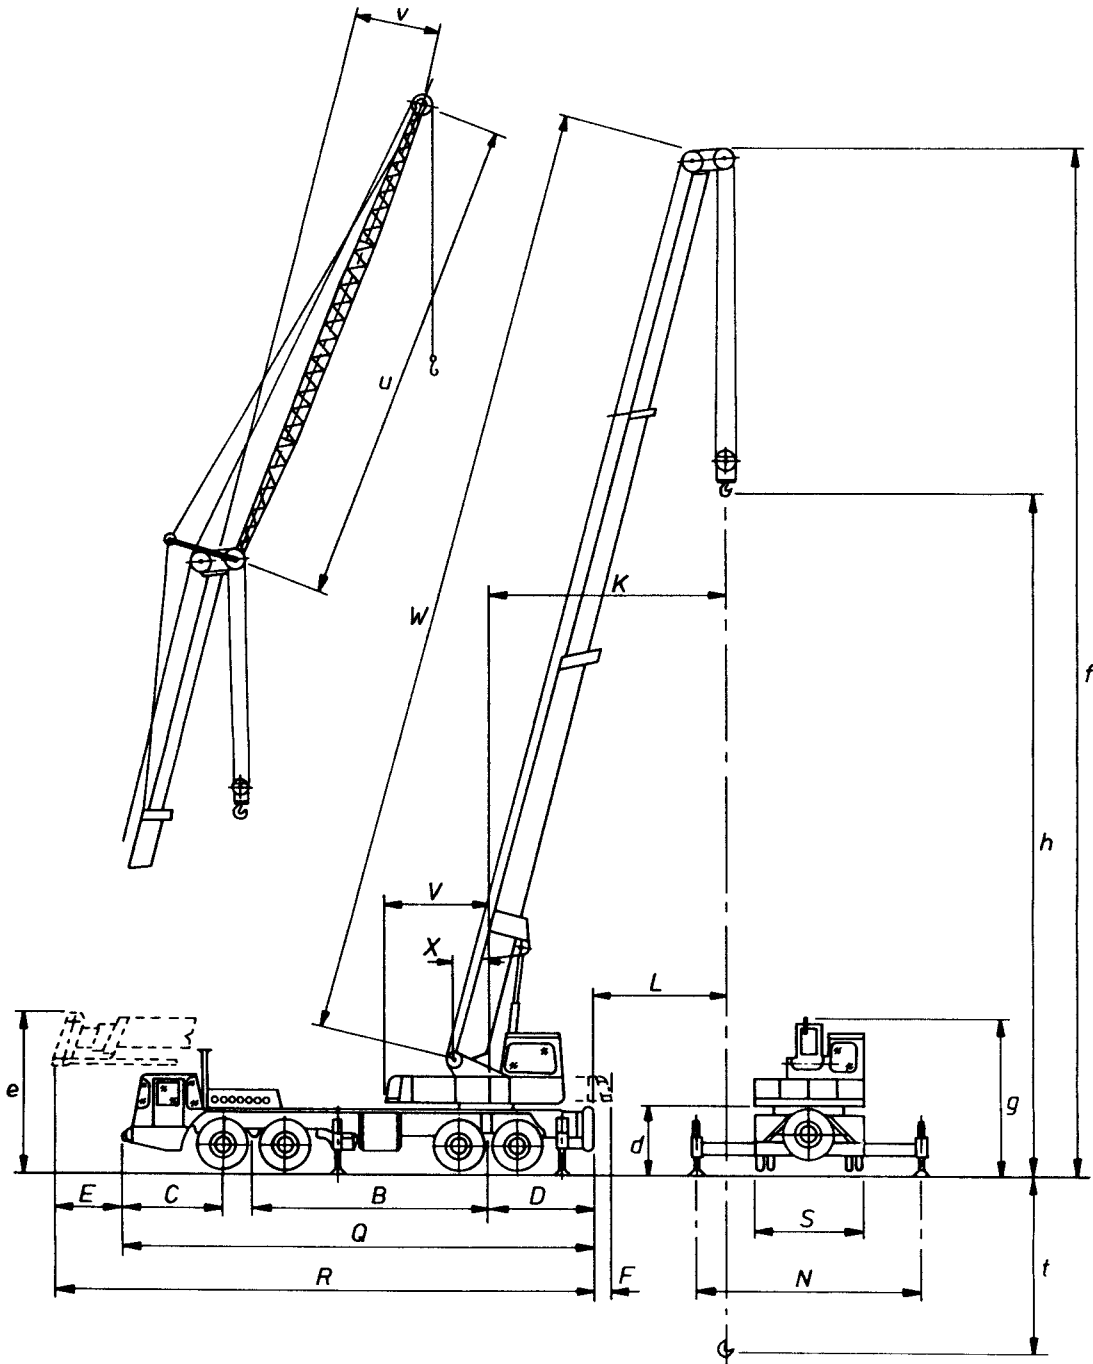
Typical truck mounted telescopic jib crane (with lattice fly jib shown inset) and outriggers
